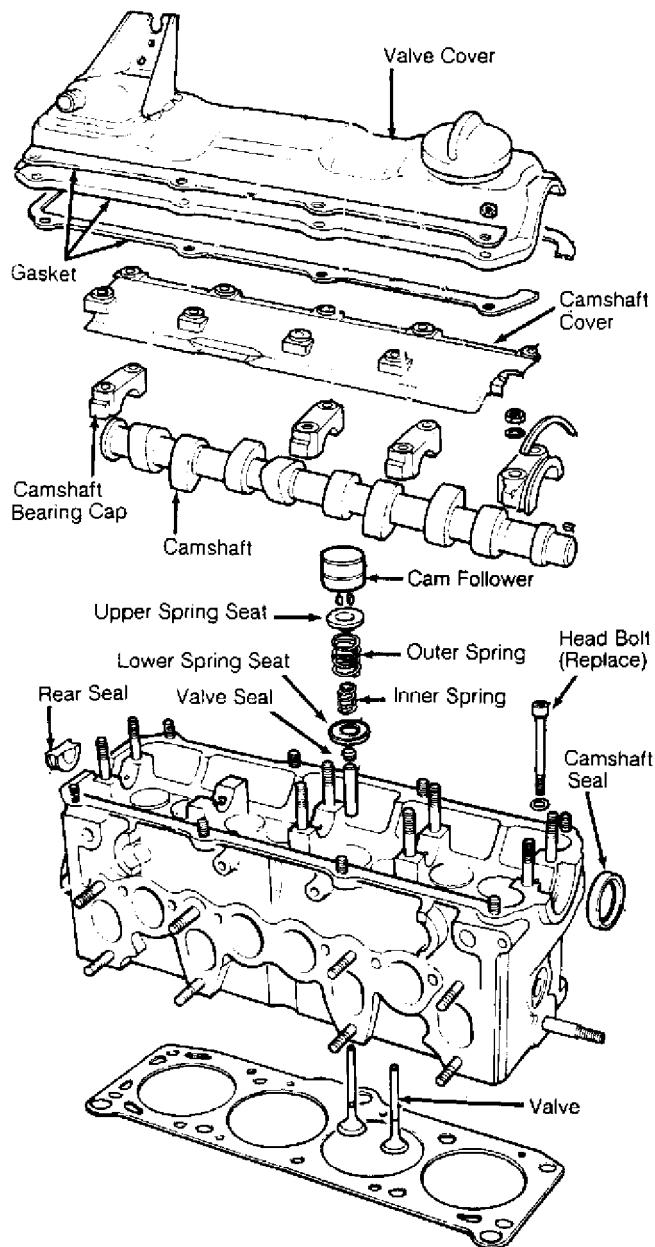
Identifying 1.8L Cylinder Head (8-Valve)
